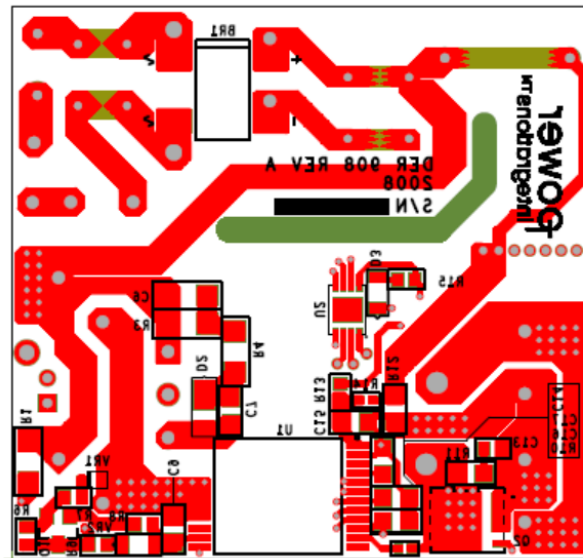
DER-908 RevA PCB Layout, Bottom.
